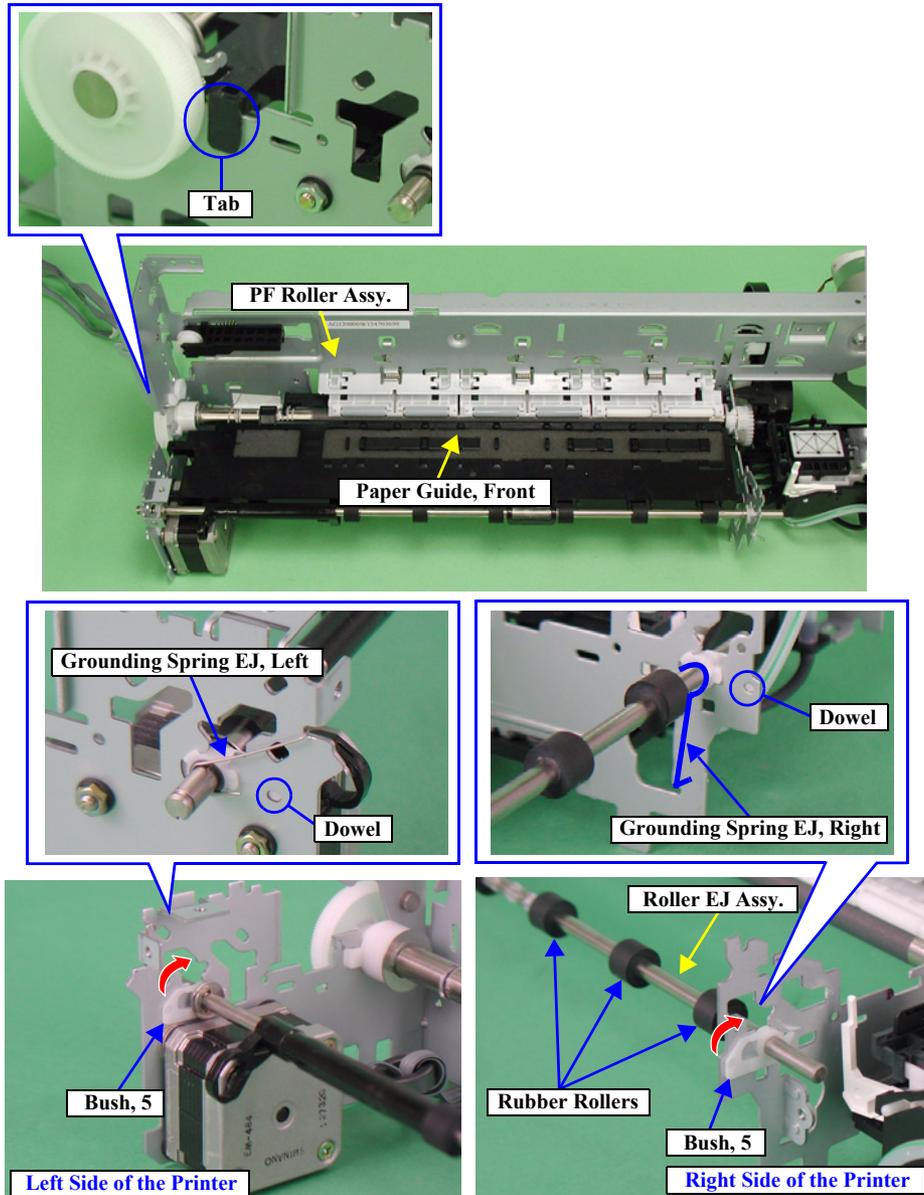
Paper Guide, Front/Roller EJ Assy. Removal (2)
